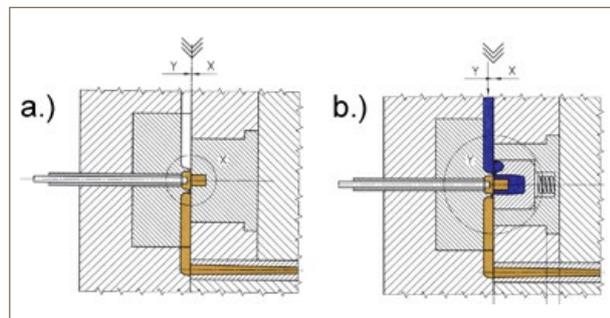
Schematic drawing of the 2-C-MIM mould. a) Injection of the feedstock without space holder. b) Injection of the feedstock with space holder
